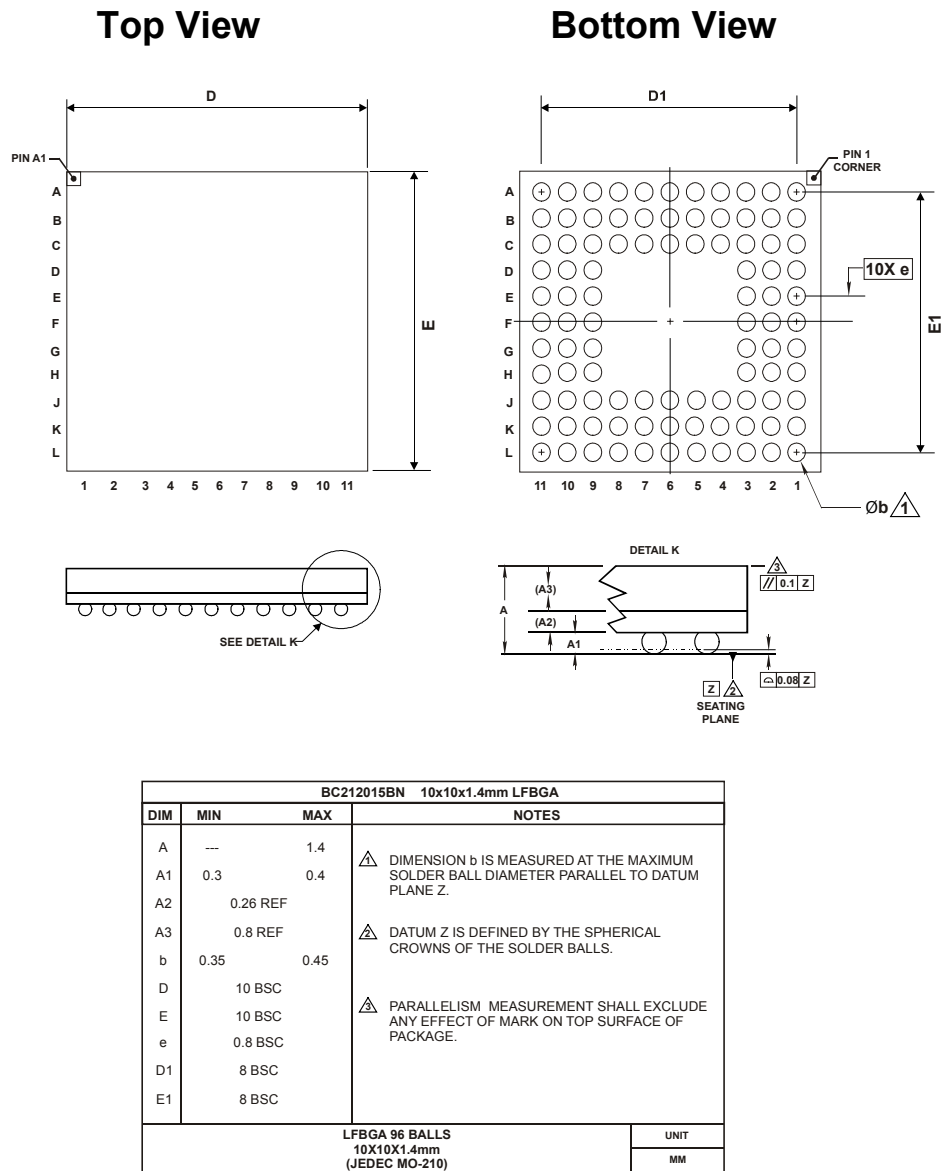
BlueCore2-External LFBGA Package Dimensions
